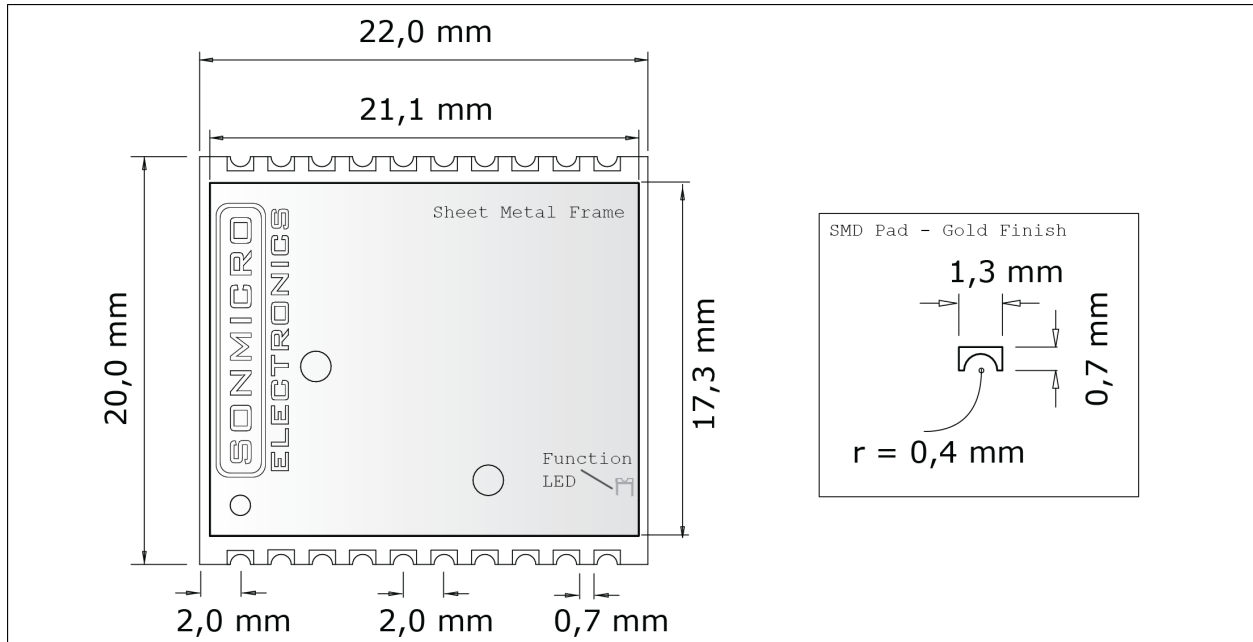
SMD Top View & SMD Pad Dimensions
